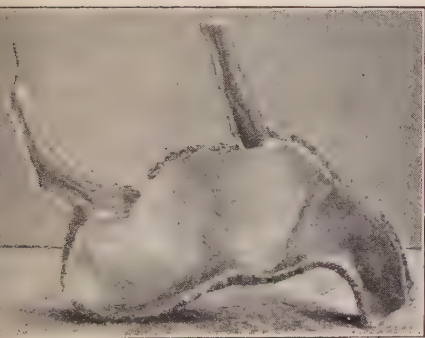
One half of the mould filled with papier-mâché and wire cloth.
